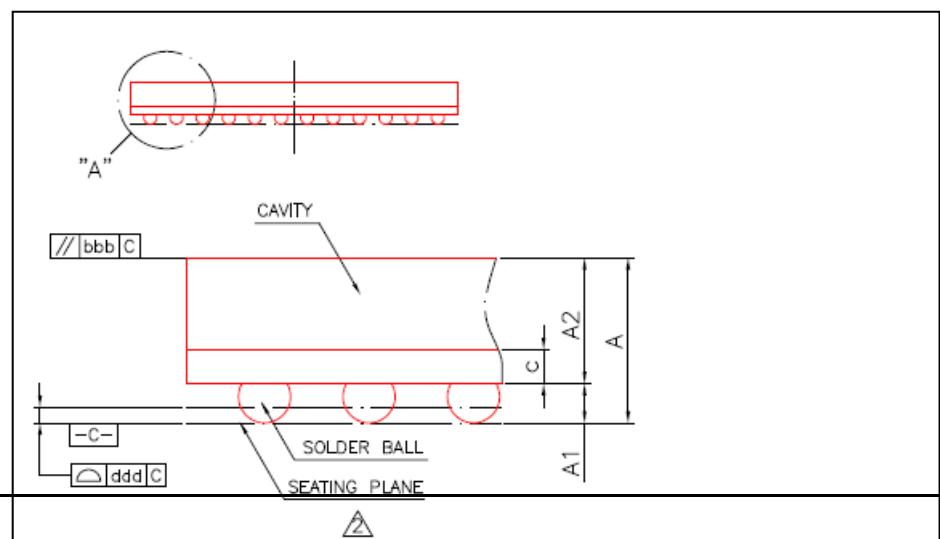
RK616 TFBGA(HF) Package Side View
